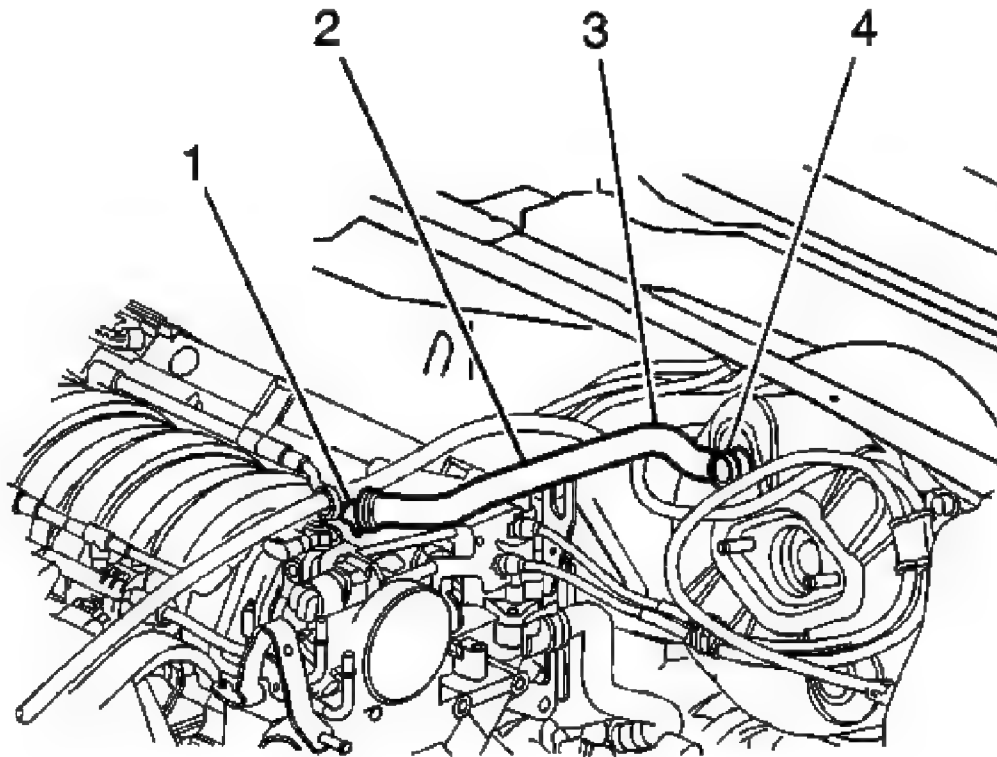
Removing/Installing Vacuum Hose & Brake Booster Vacuum Check Valve
